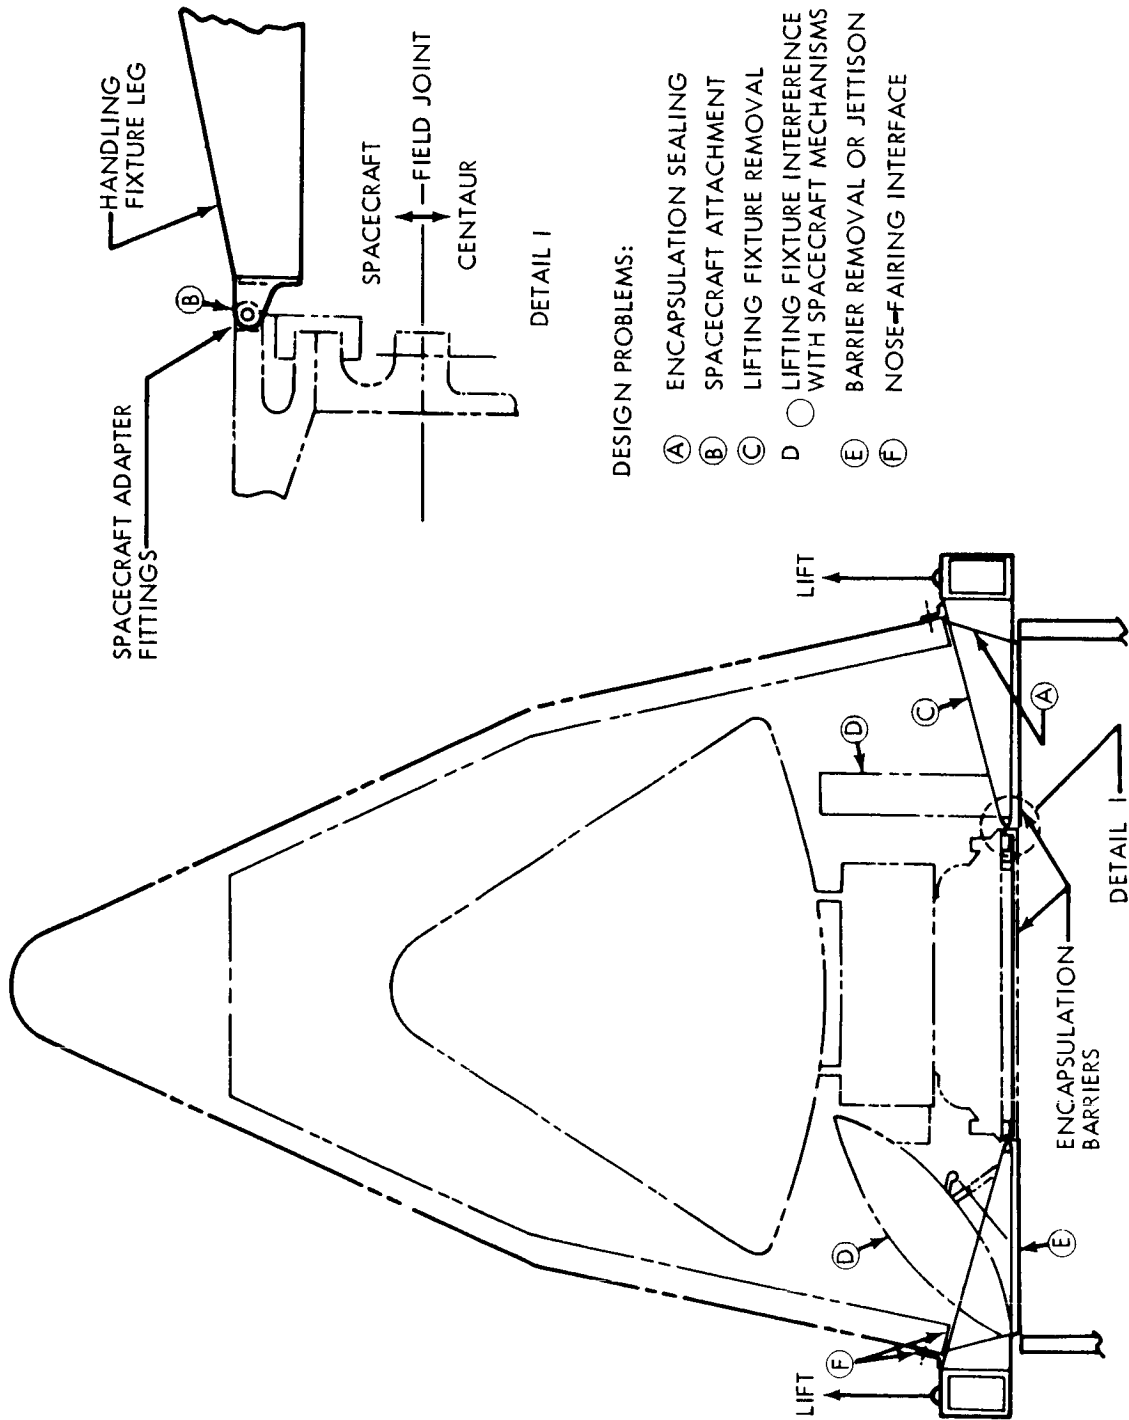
Encapsulated Spacecraft Lifting Fixture
